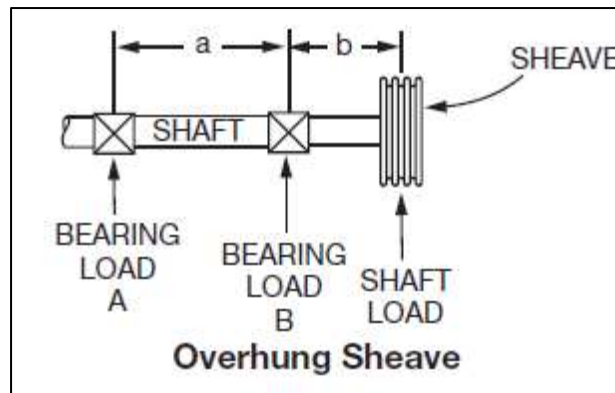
Bearing and Sheave Configuration (Baldor Electric Company, 2013)
